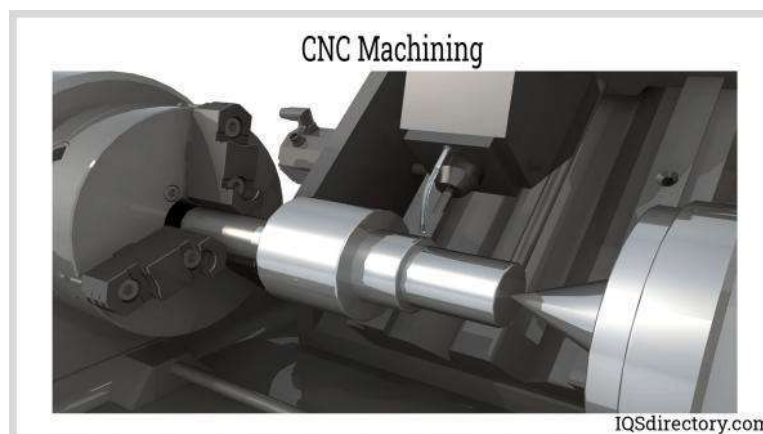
View of the real working process of a cutting tool on a CNC lathe
